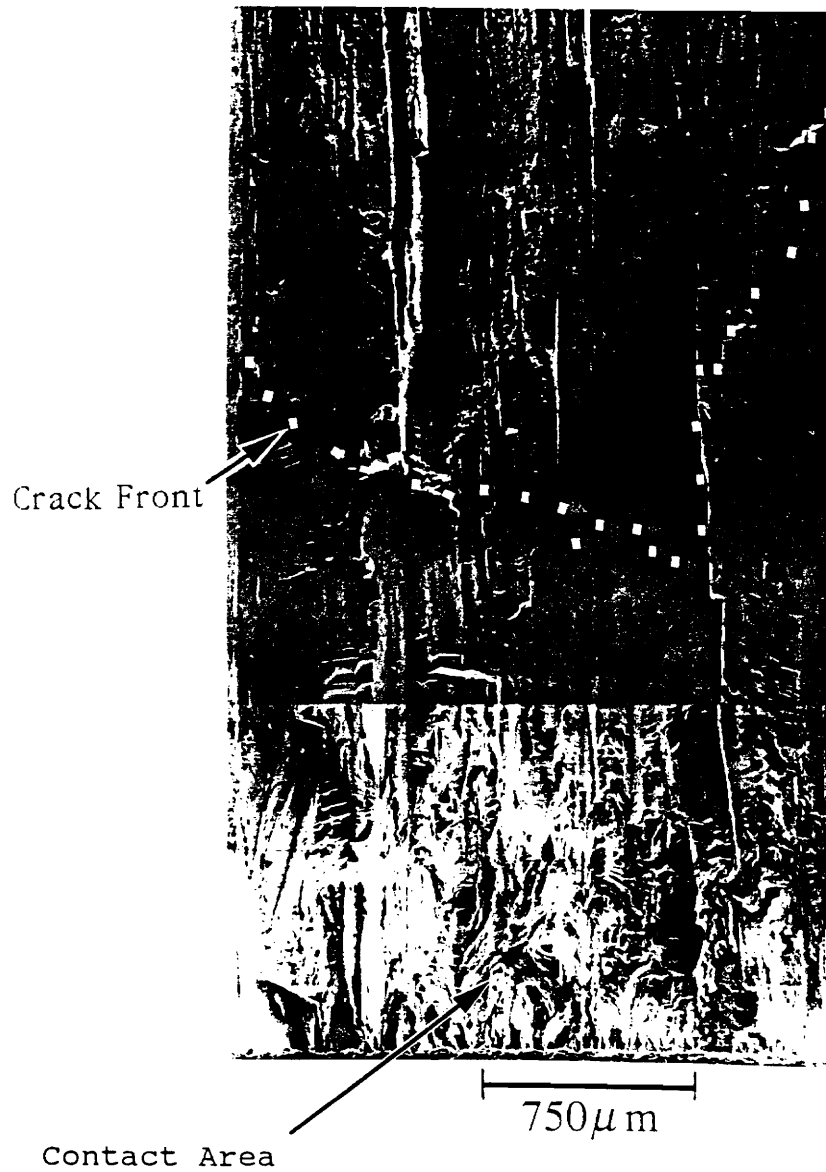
Fracture surface of Al-Li alloy specimen showing a non-uniform crack front (white sequence) and the contact area. Crack propagation direction is from bottom to top.
